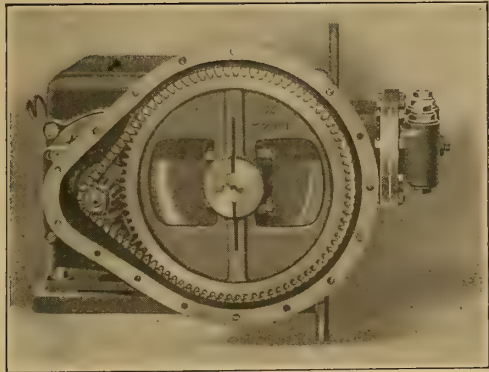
MOTOR DRIVEN AIR COMPRESSOR
